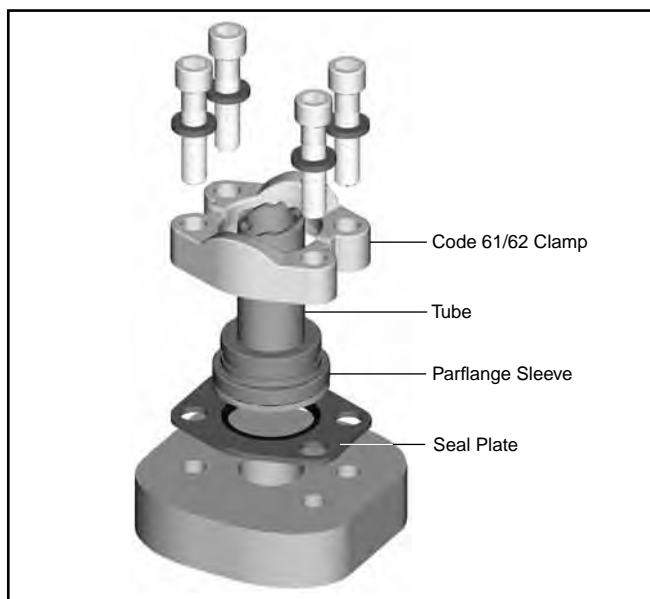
Formed Tube with ISO 6162 (SAE J518) Connection
